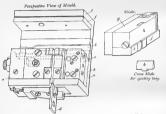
Monotype mould ; single-blade. Scale : about half size.
